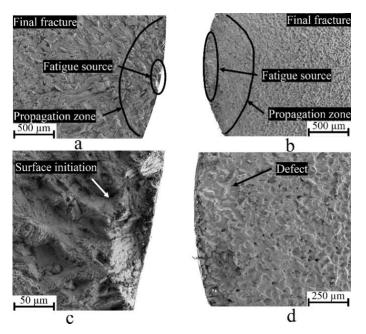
Fracture surfaces of (a) defect-free and (b) defect-bearing joints; (c) enlarged
